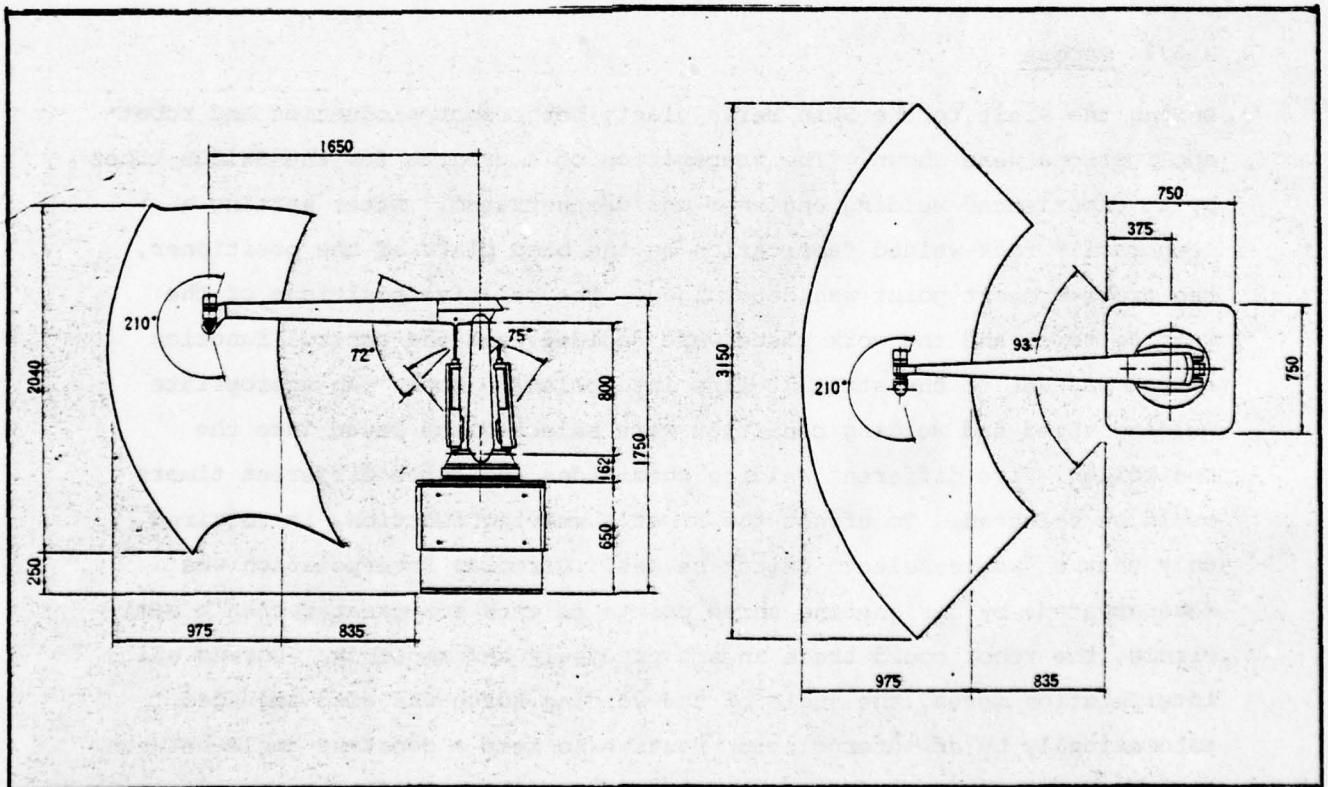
KOBE ARCMAN ARC-WELDING ROBOT
